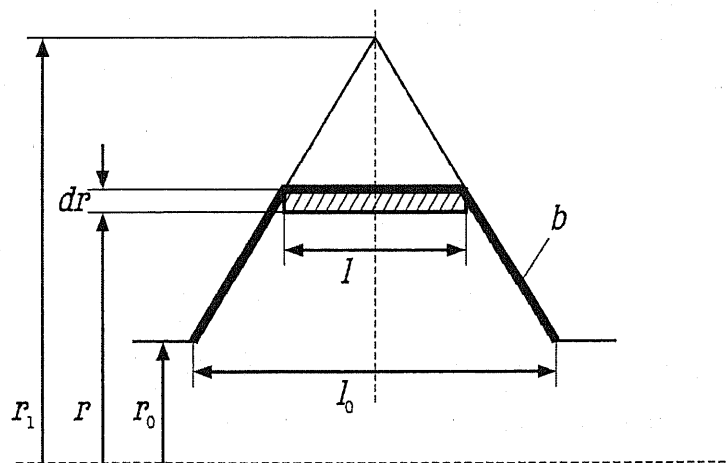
Length of contact part with an internal thread of workpiece:  $b$ .
